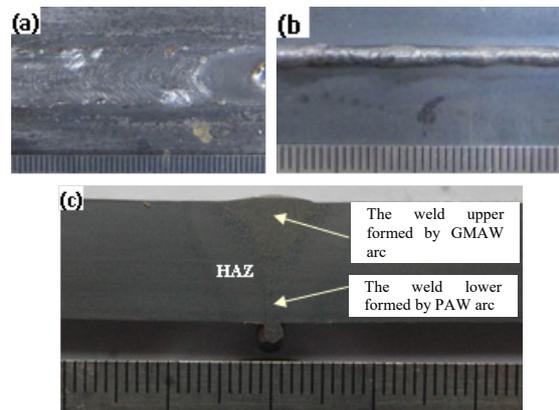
Weld bead and cross section of Plasma-GMAW hybrid welding. (a) Top surface; (b) Bottom surface and (c) Cross section
